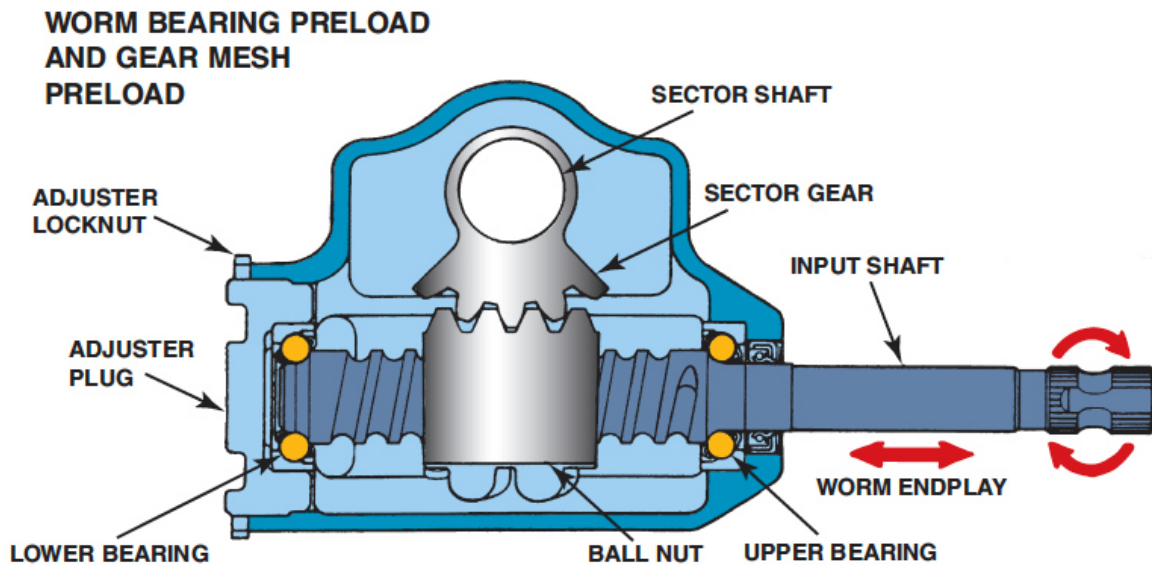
Worn shaft end play or preload is adjusted at the adjuster plug.
